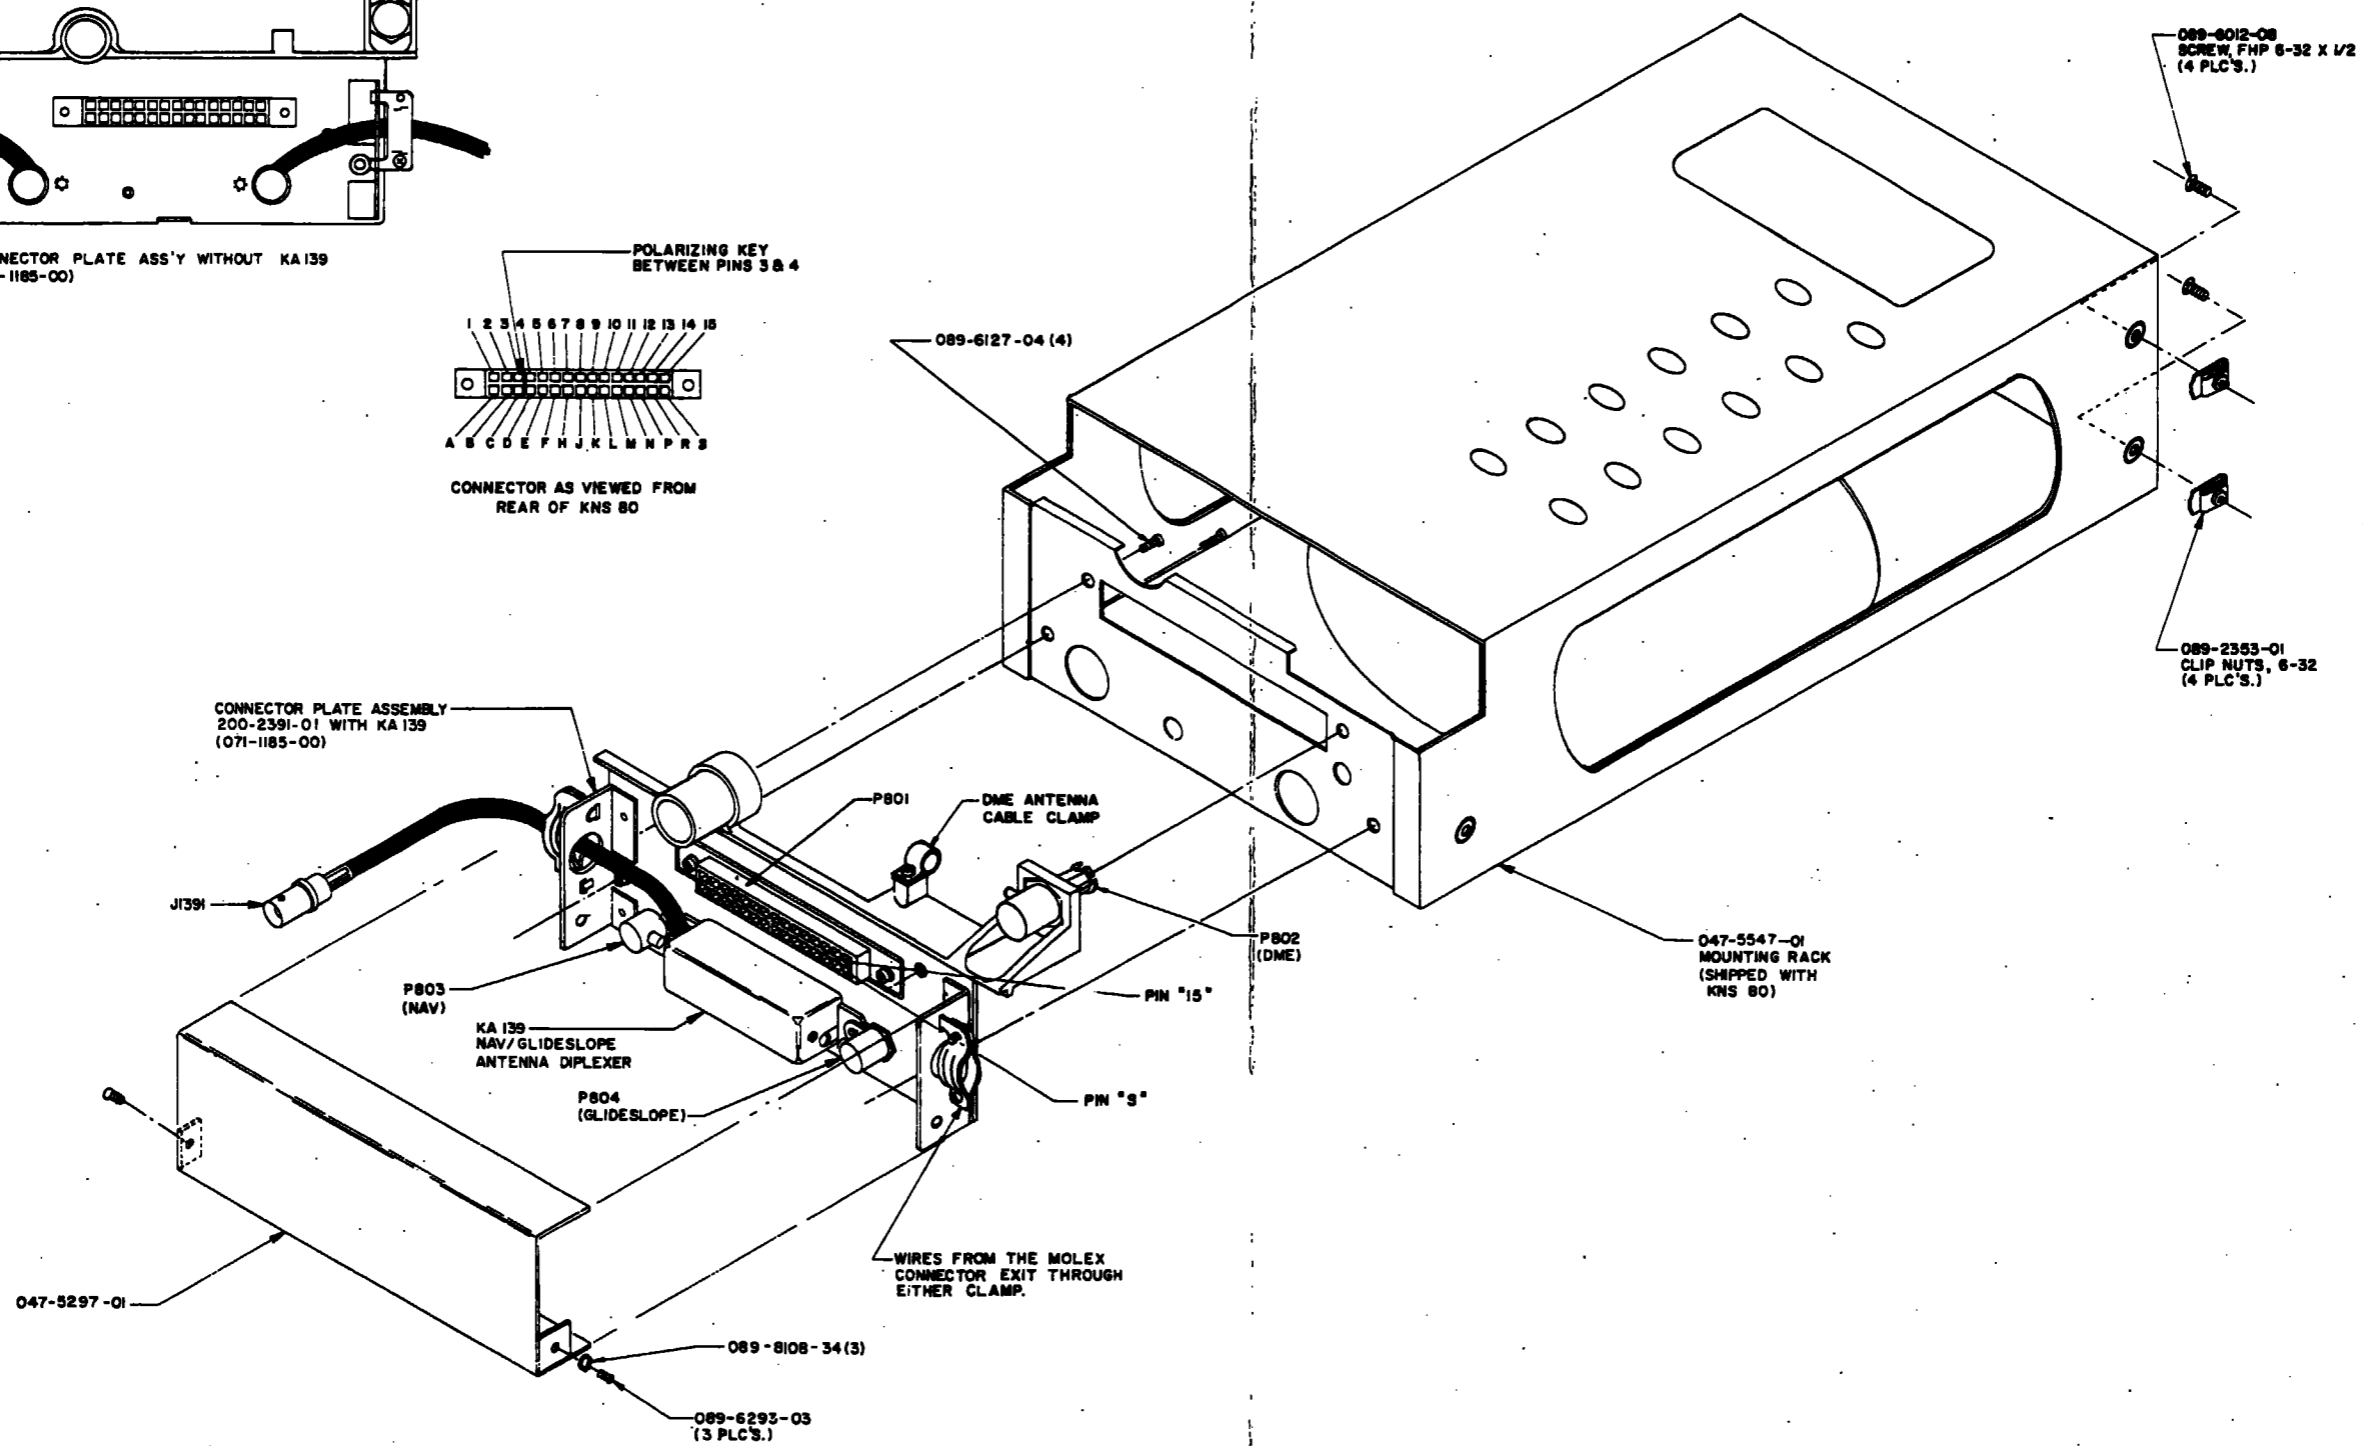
KNS 80 INSTALLATION DRAWING
